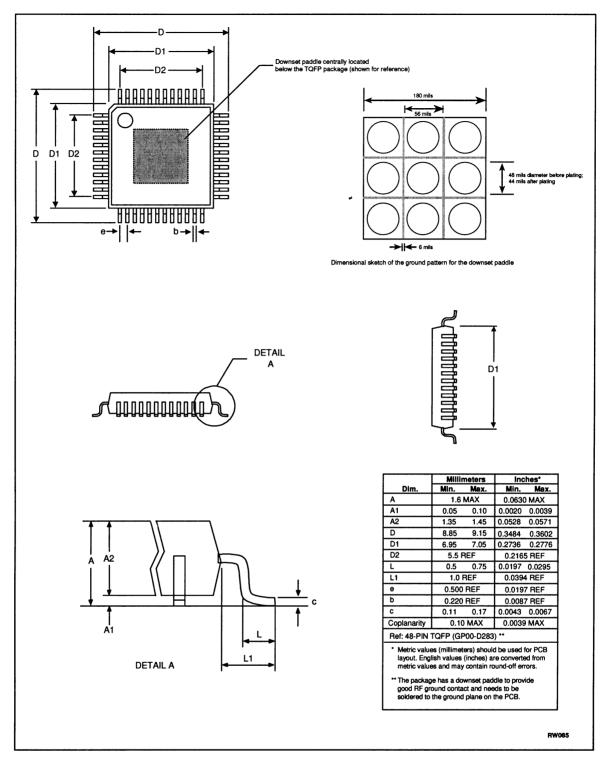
RF250 Rx ASIC Package Dimensions - 48-pin TQFP Package With Downset Paddle
